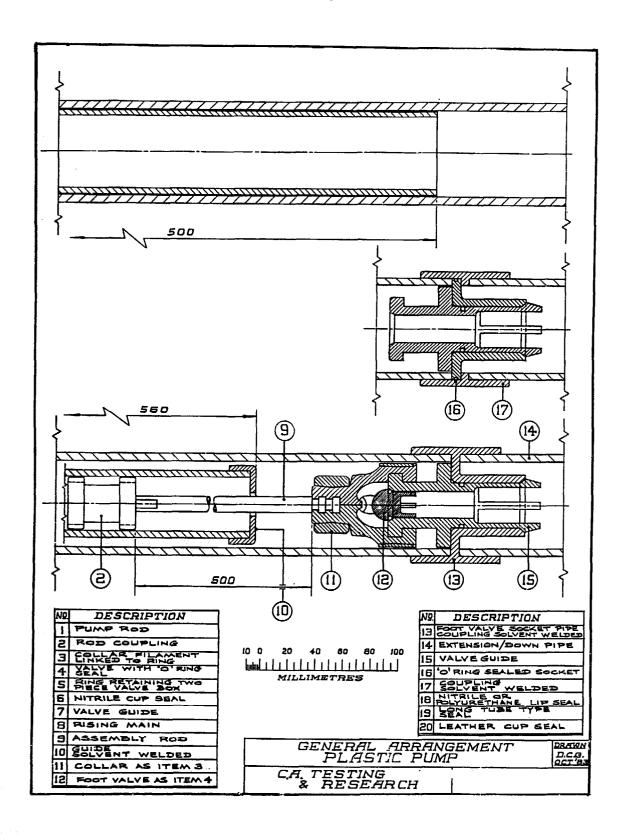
GENERAL ARRANGEMENT OF PLASTIC CYLINDER ASSEMBLY
